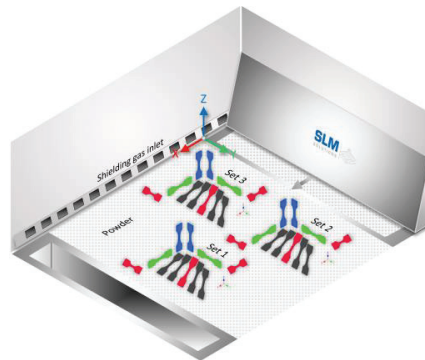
Layout of Inconel 718 specimens in the build chamber. Figure from Paper 1.
